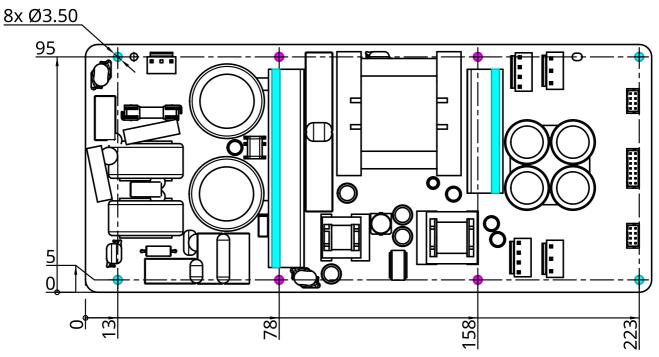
ICEpower 1000S mounting holes (marked for top side/heatsink mounting).
